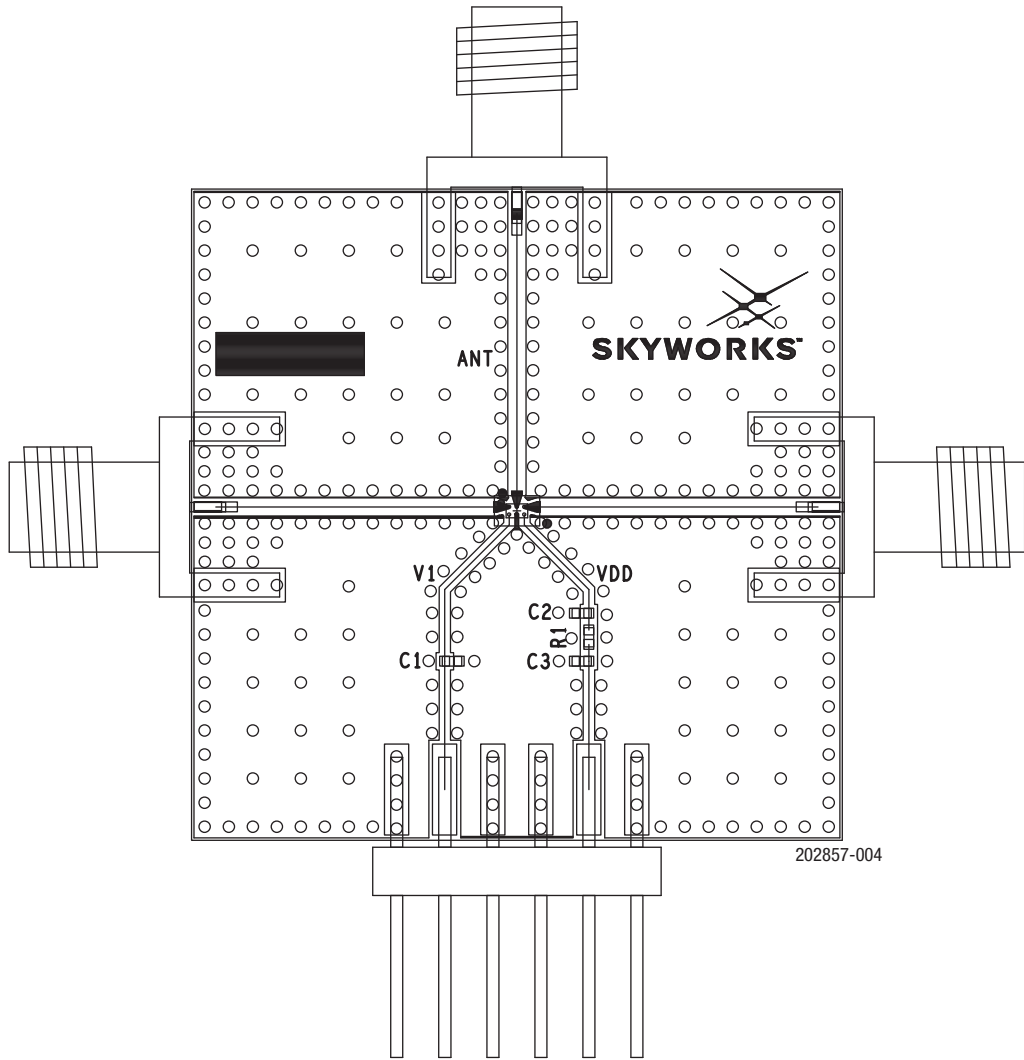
SKY13489-001 Evaluation Board Assembly Diagram
